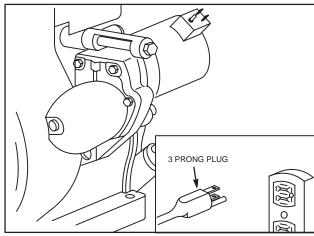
120 VOLT GEAR DRIVE STARTER
